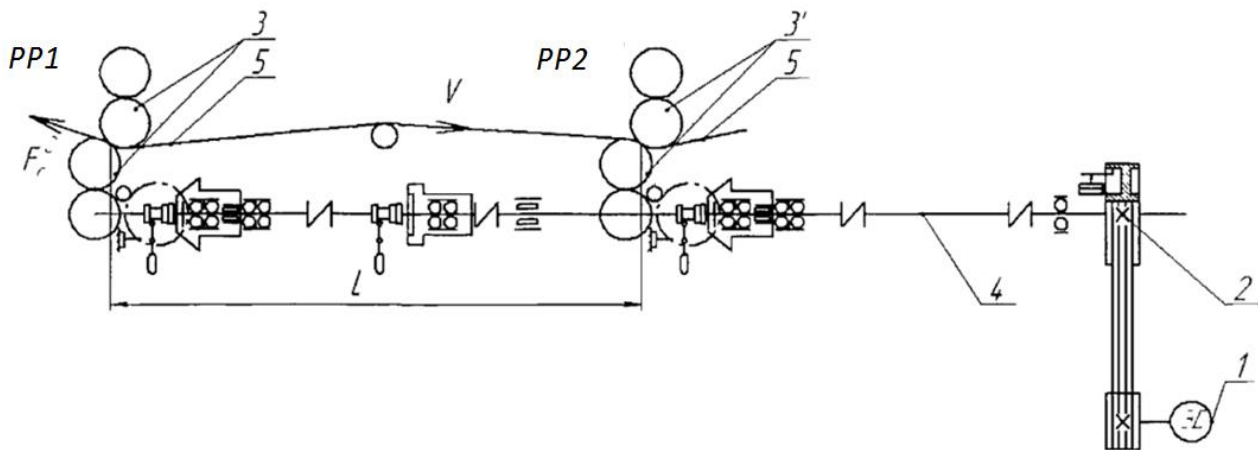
Scheme of the drive of the working object, consisting of two printing machines with a single engine with a horizontal synchronous shaft
